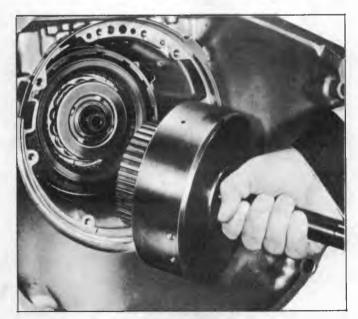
T--Installing Forward Clutch Assembly and Turbine Shaft
